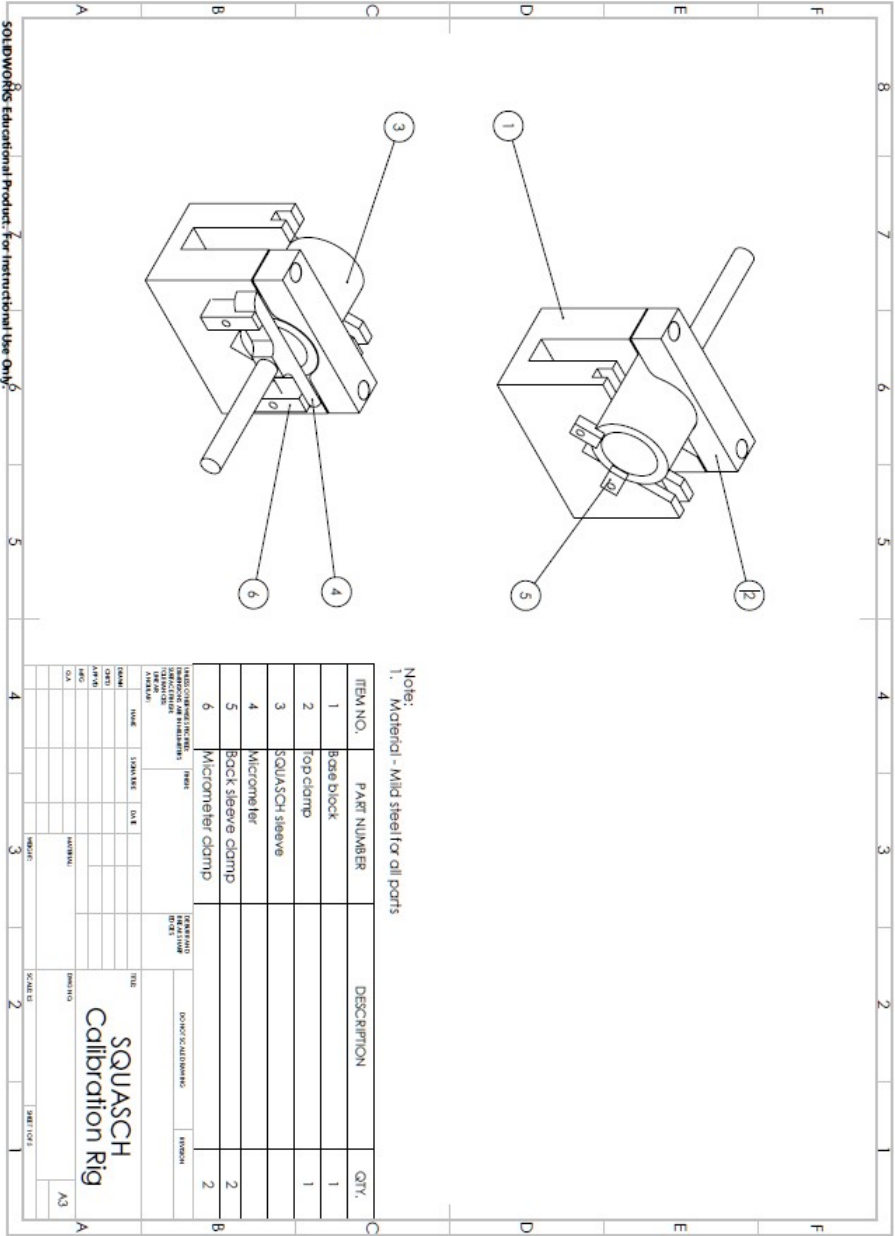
Assembly drawing for the sub-press calibration mounting fixture.
